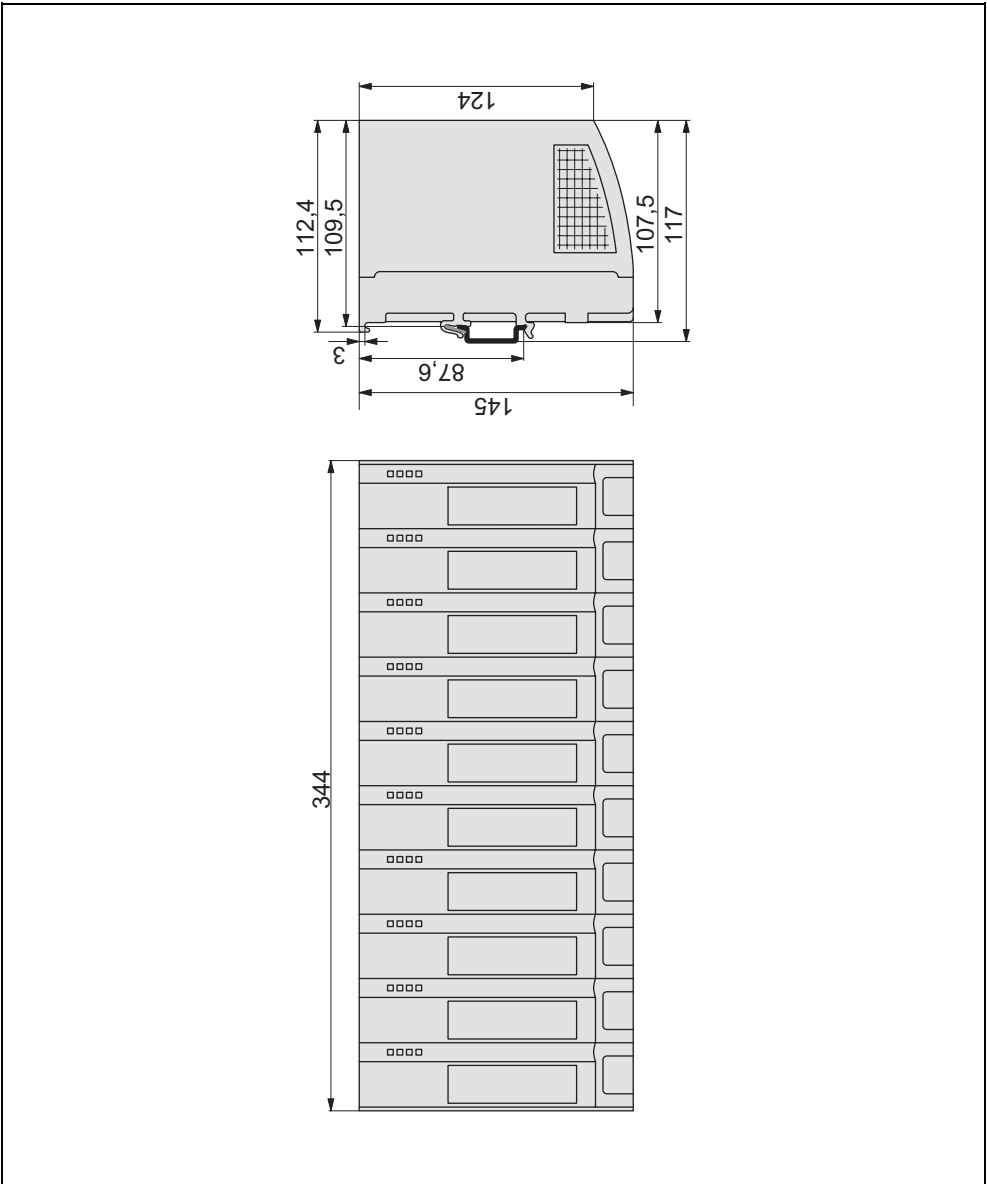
Dimension drawing - SCALANCE X414-3E
